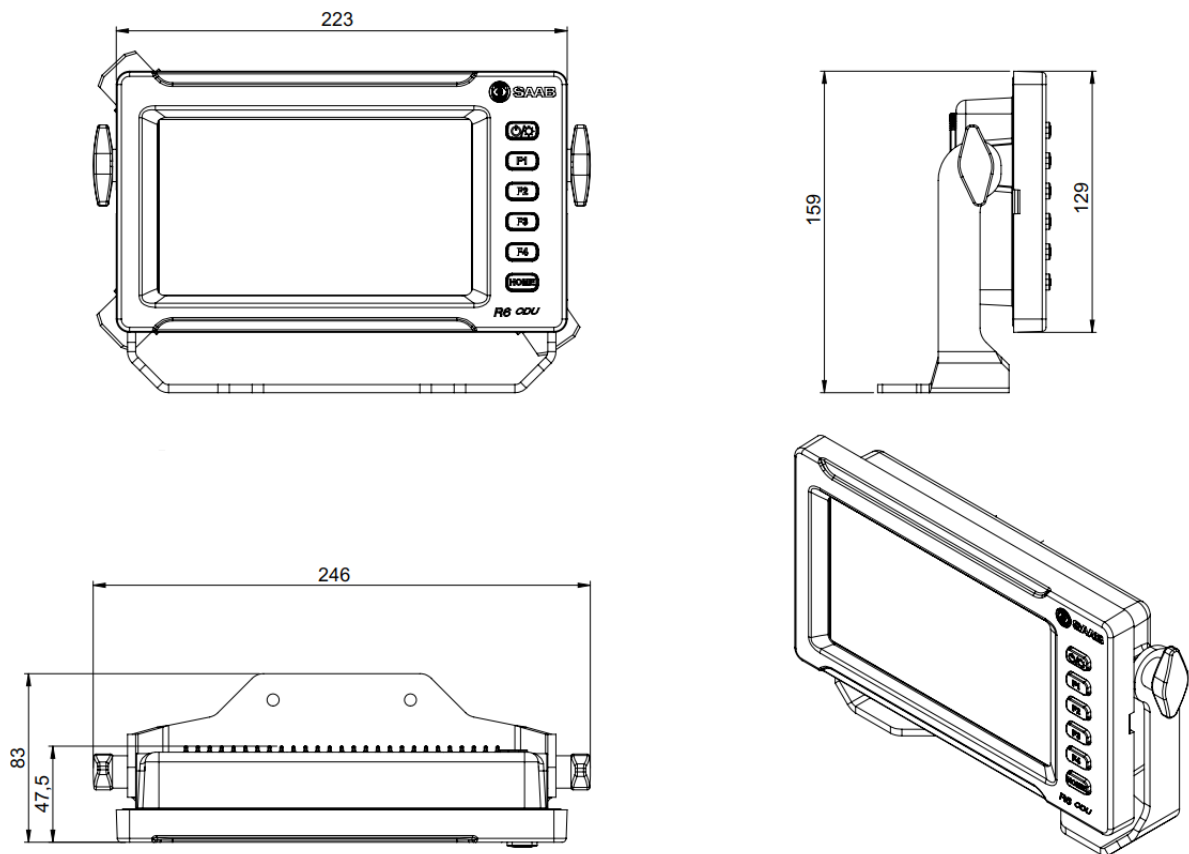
R6 CDU Mechanical Drawing [mm]
